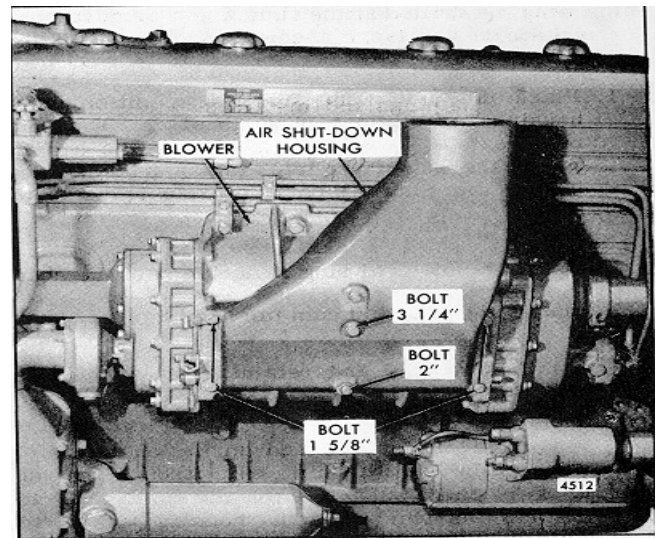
Air Shut-down Housing Mounting and Bolt Location
